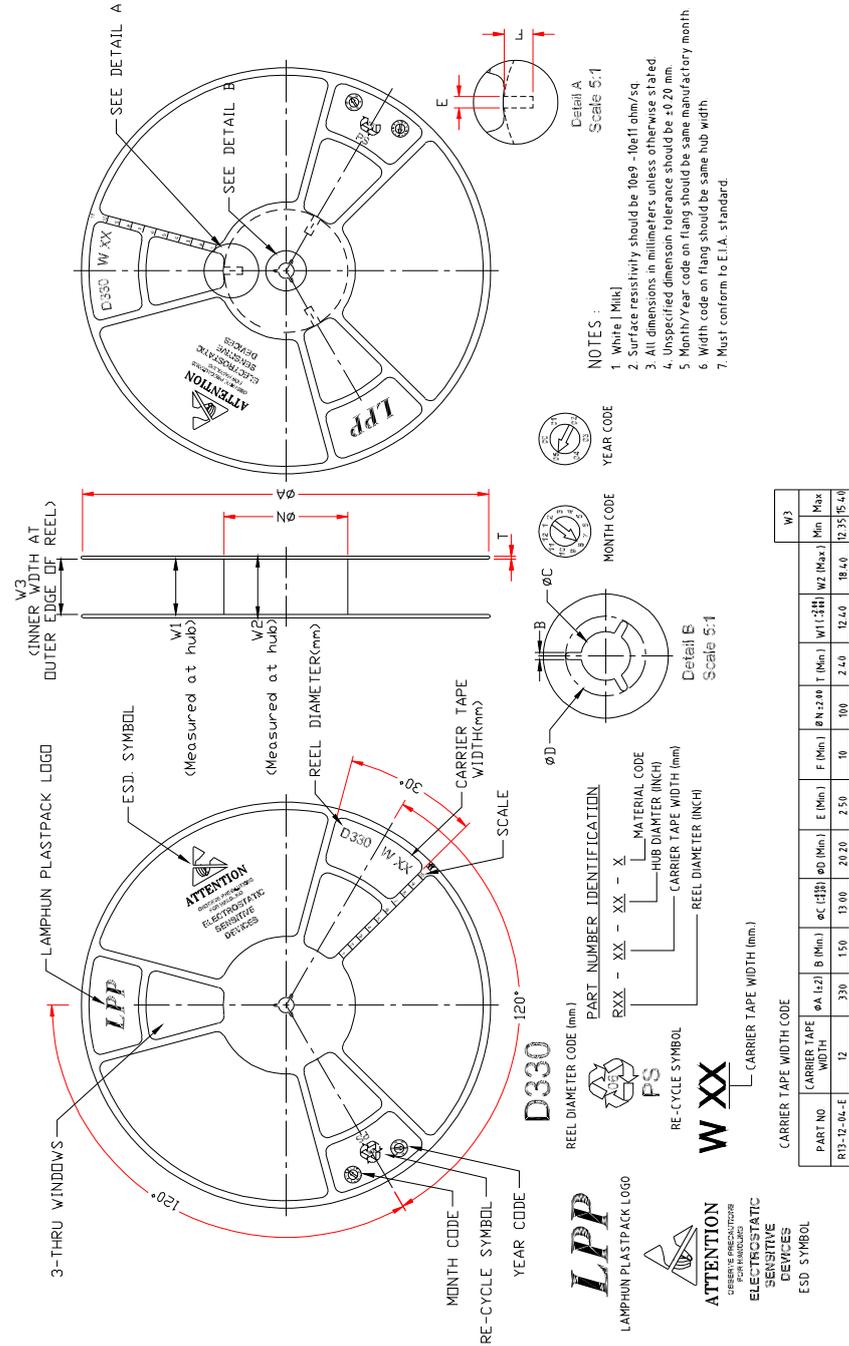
DFN12 (3 x 3 mm) reel dimensions
